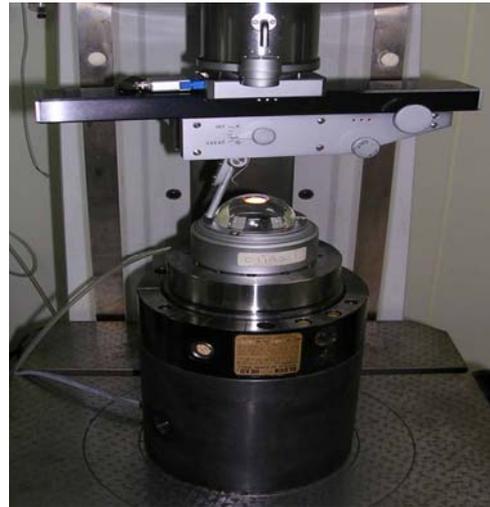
Roundness tester with air bearing rotating turntable for multi-step error separation.
